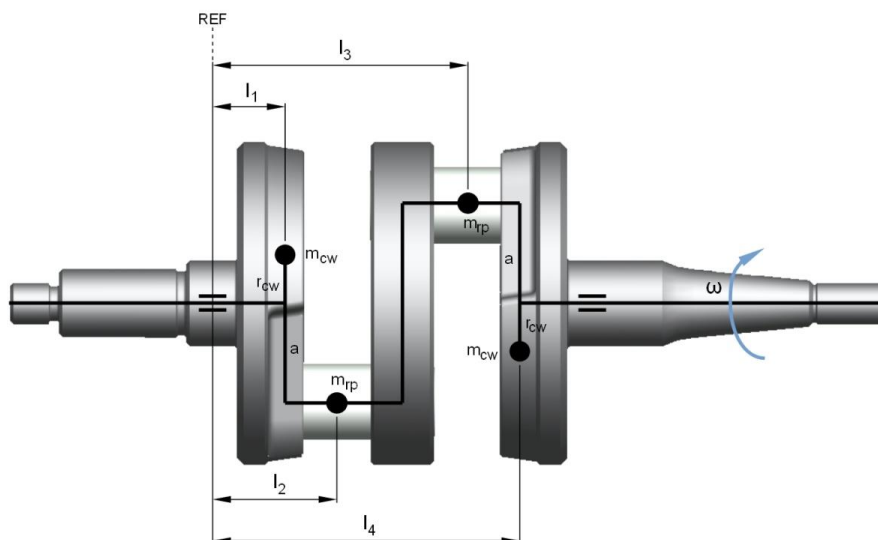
MODEL OF MANUFACTURED TWO-CYLINDER UAV CRANKSHAFT WITH BEARINGS, POINT MASSES, RADII AND LENGTHS FROM REF PLANE SUPERIMPOSED.
